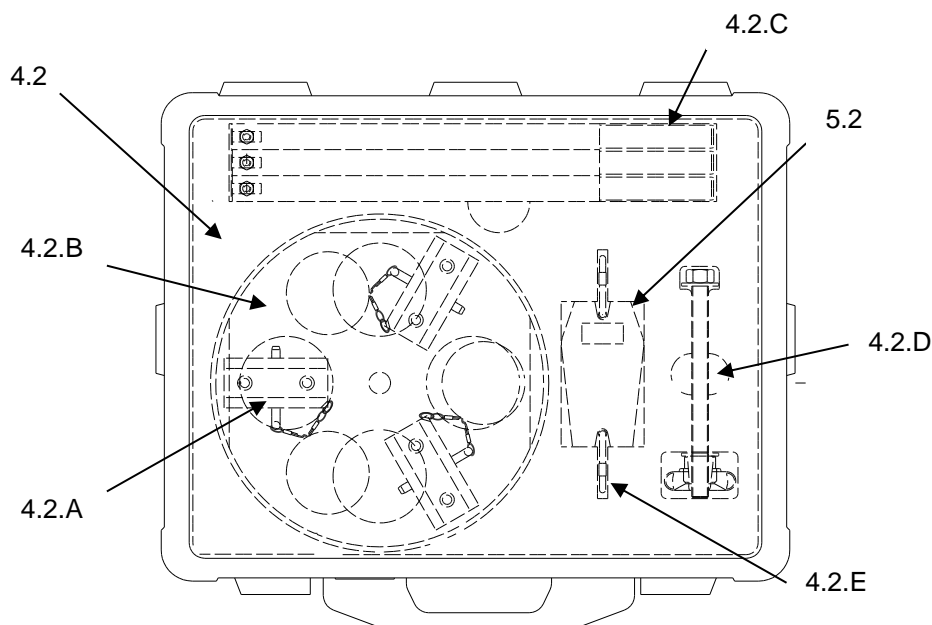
Tool Kit, Swashplate Assy Assembly Case 2 Main Parts
